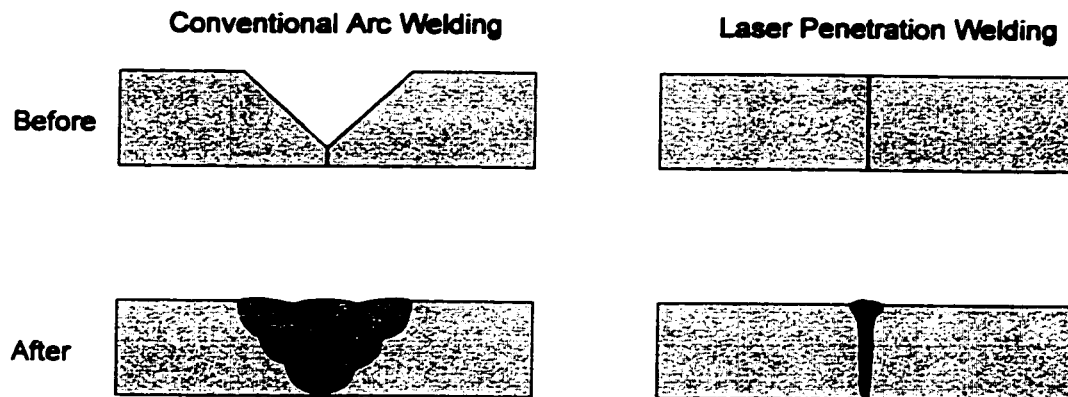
Schematic comparison of conventional (multi pass) arc welding techniques to that of laser penetration processing for butt welding of thick plate steel.
